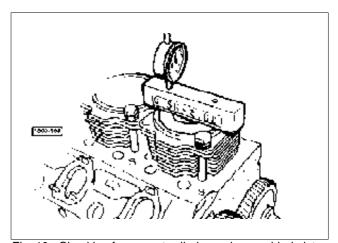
Checking for correct cylinder and assembled piston positioning at T.D.C. Measure the piston protrusion from cylinder and select the suited gasket type to be fitted between cylinder and cylinder head as shown on page 27;
